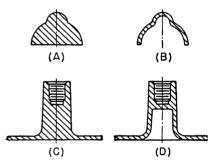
Metal savers—cores that extend part way through projections, bosses, and heavy sections—not only decrease the weight but minimize porosity. They should be considered whenever heavy sections must be cast.
